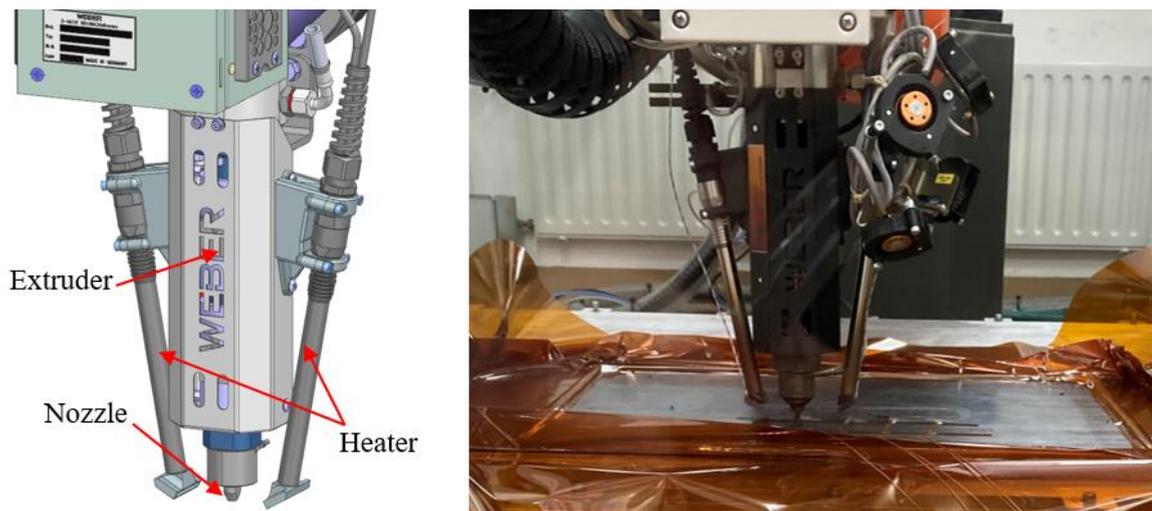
CAD design of the heater(left) and the entire assembly during temperature measurements (right).
